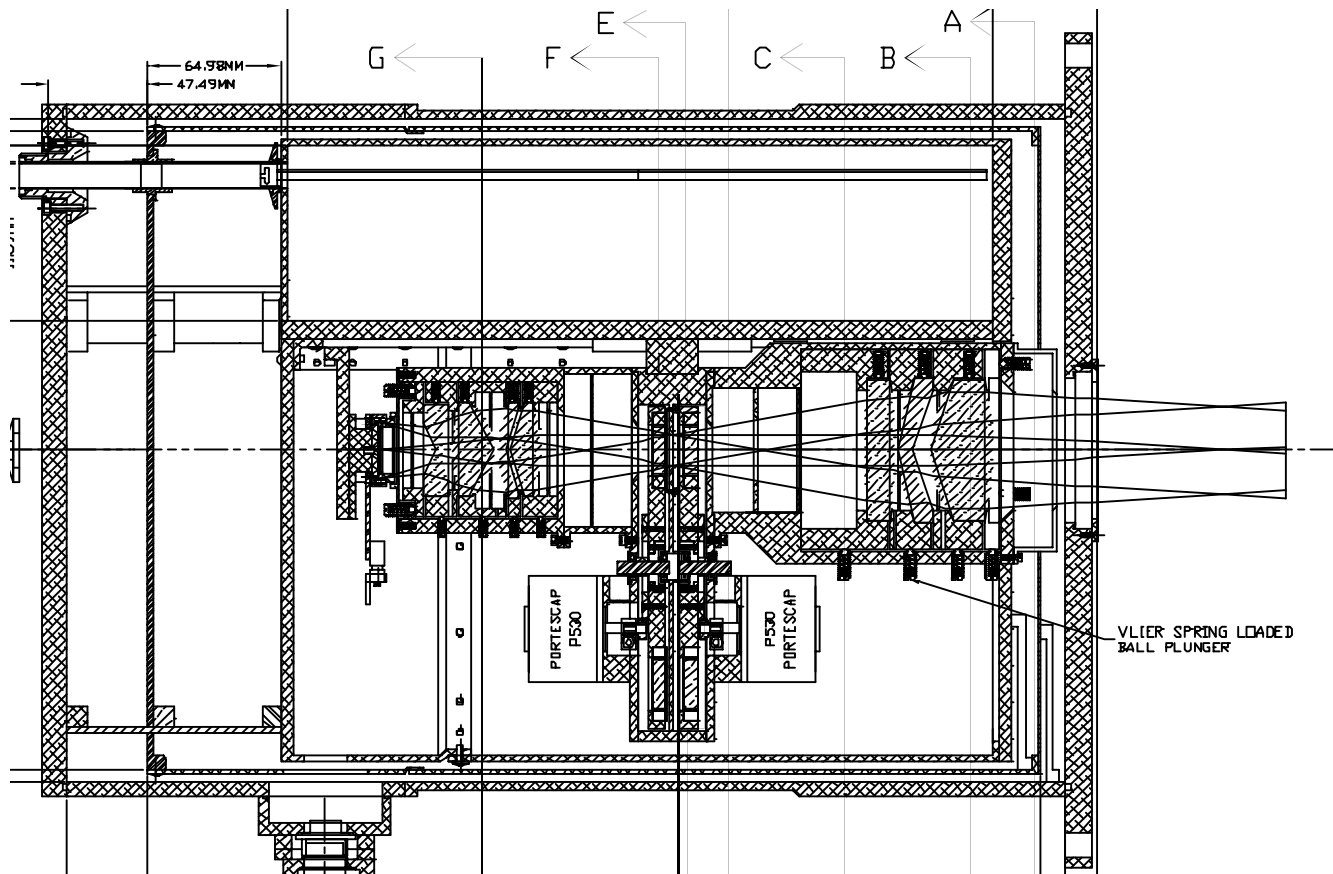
CFHTIR Cryostat. Mechanical drawings of the cryostat showing cold tank, cold work surface, optical bench, filterwheel assembly and focal plane assembly.
